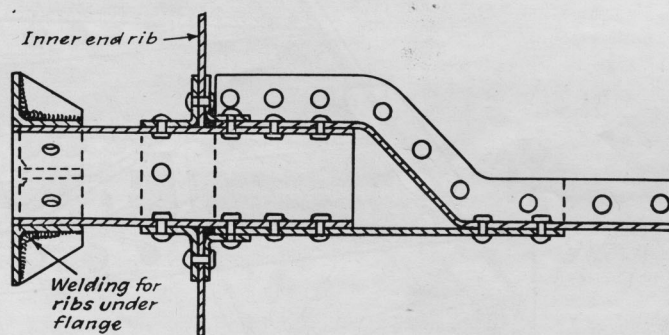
Elevator torque-tube detail, showing the method of attaching the tube to the elevator spar.
